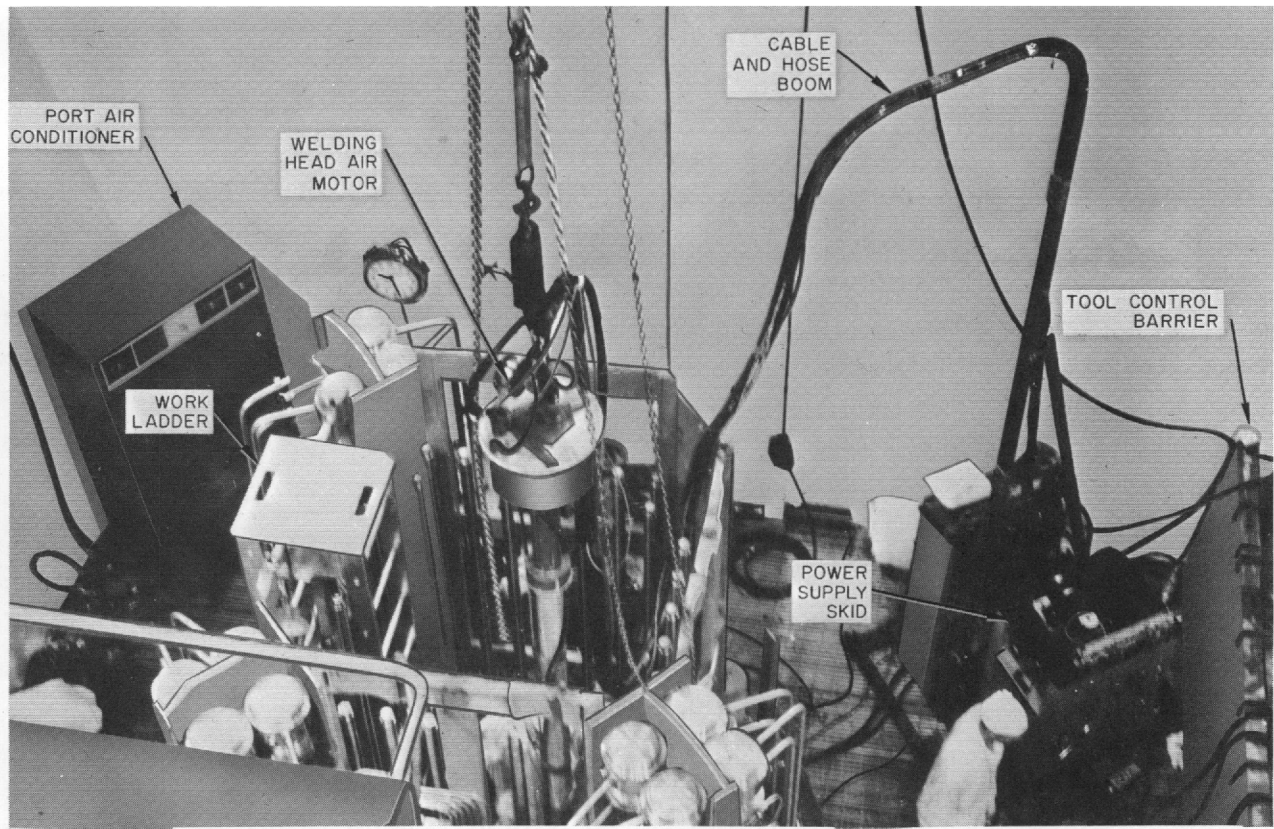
Omega Seal Welding Machine in Operation.
